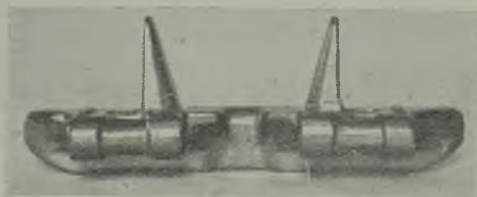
CASTING WHICH IS DRILLED USING AIR CHUCKS.
